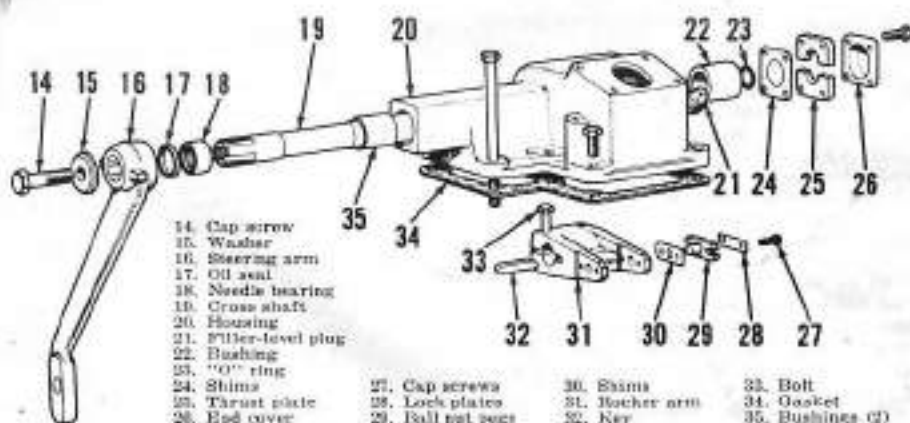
Exploded view of model 1200 steering gear housing, cross shaft and steering arm. Shims (24) are used to center rocker arm only and do not control cross shaft end play.
